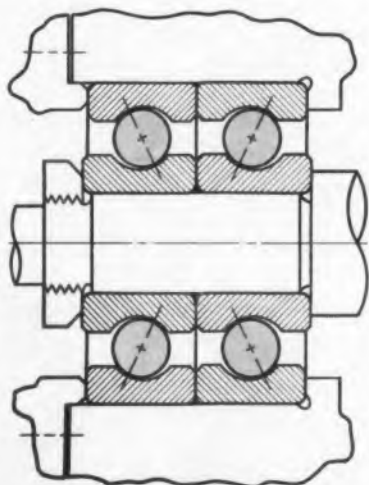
Face-to-face pair also provides rigidity but is less sensitive to misalignment. It is used when housing runs hotter than shaft. As in DB mounting, bearing at opposite end, if used, must have axial clearance to avoid thrust constraint.
